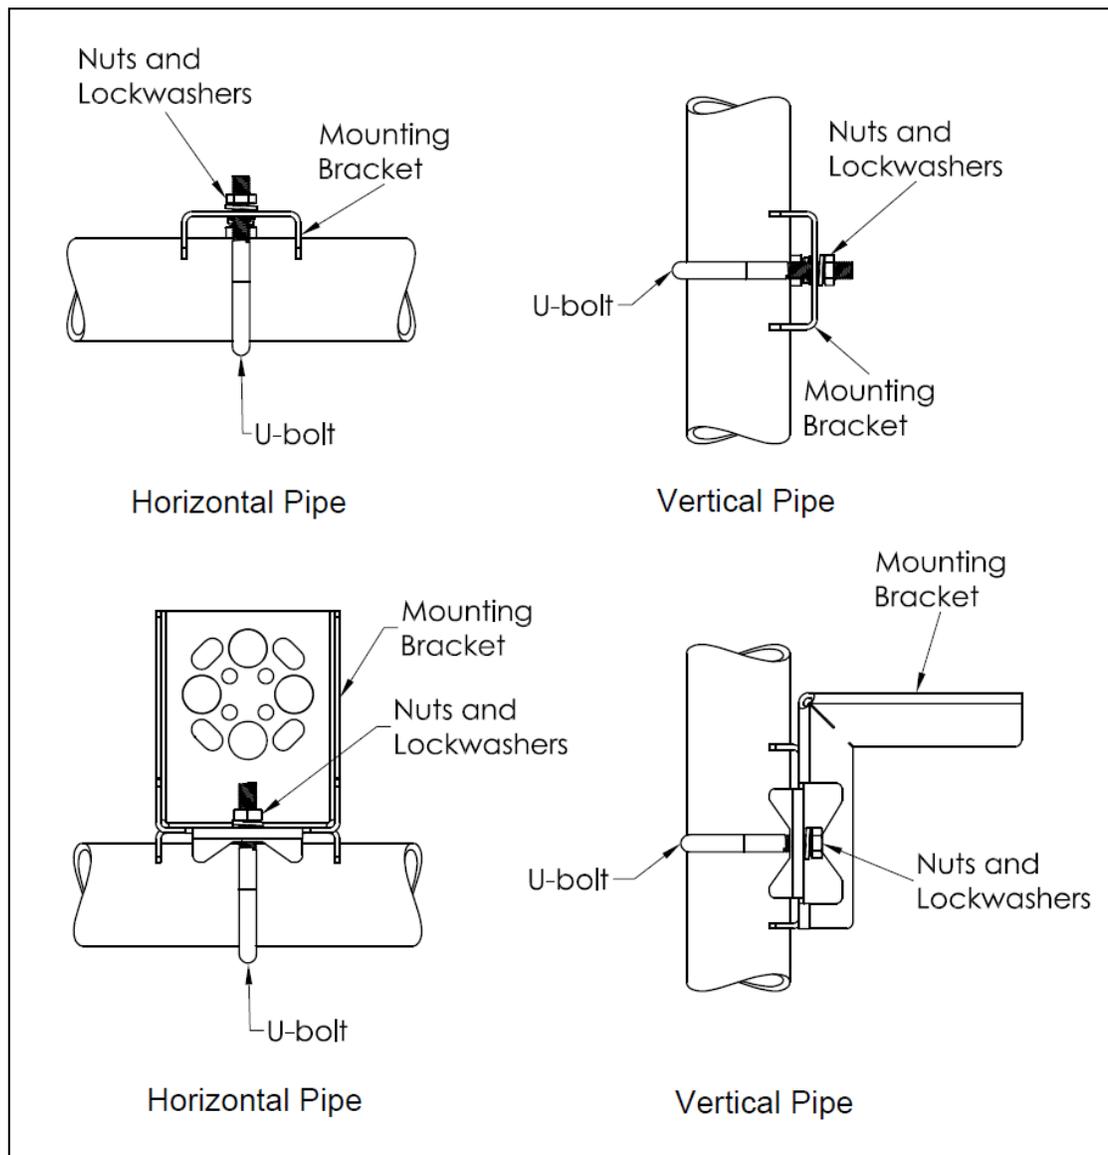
Pipe Mounting Bracket Secured to a Horizontal or Vertical Pipe
